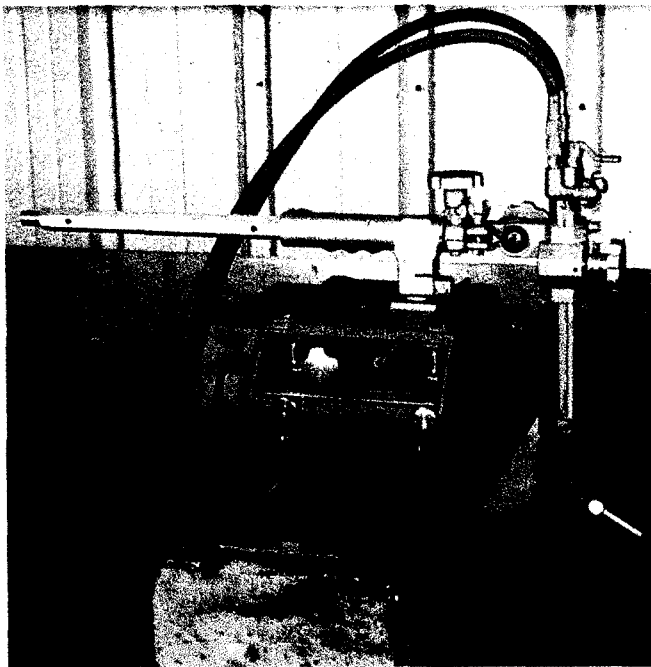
Machine Cutting Torch Mounted on a Portable Carriage
